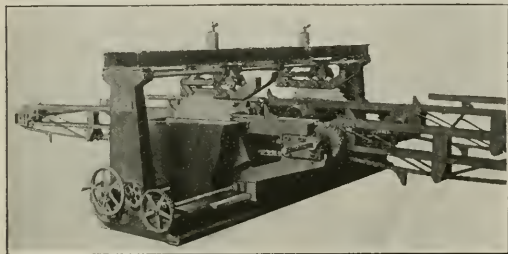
TIE-SAWING OR TRIMMING MACHINE
